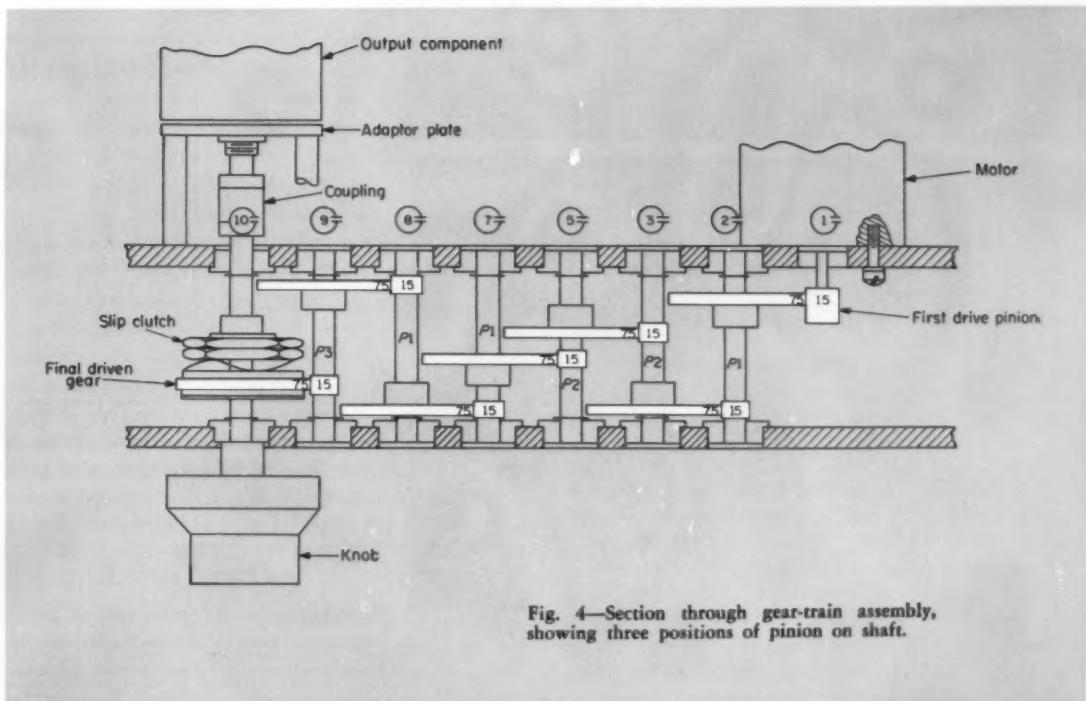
Section through gear-train assembly, showing three positions of pinion on shaft.
